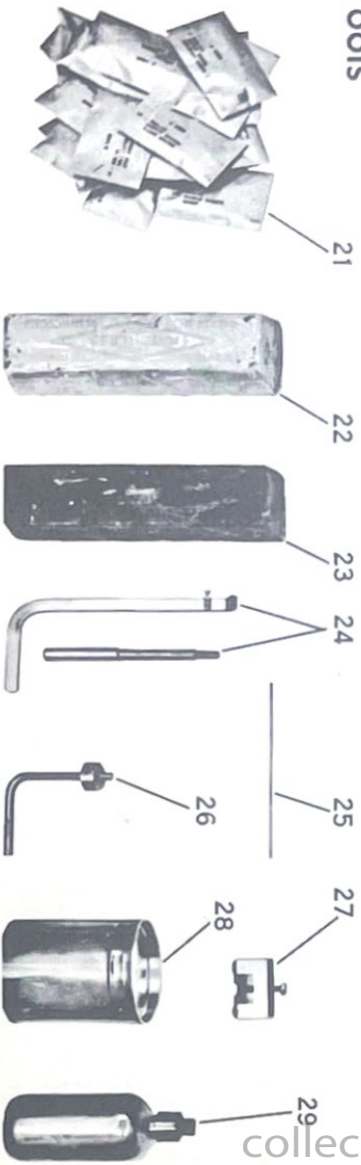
Surface nozzle group, special and obsolete parts, and tools
